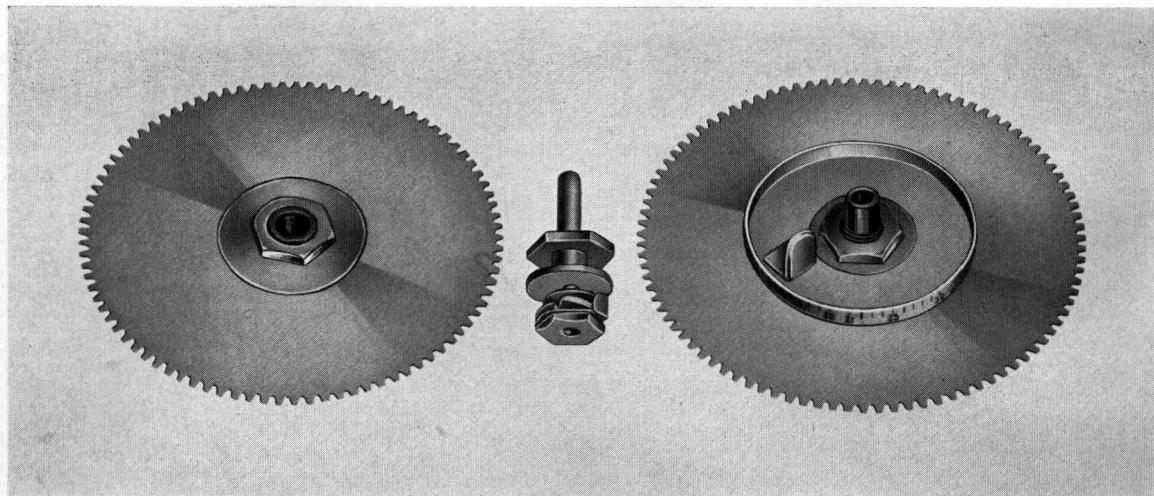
The flexible-gear assembly is mounted on the brush carriage and is meshed with a driving gear to rotate the brush carriage.
